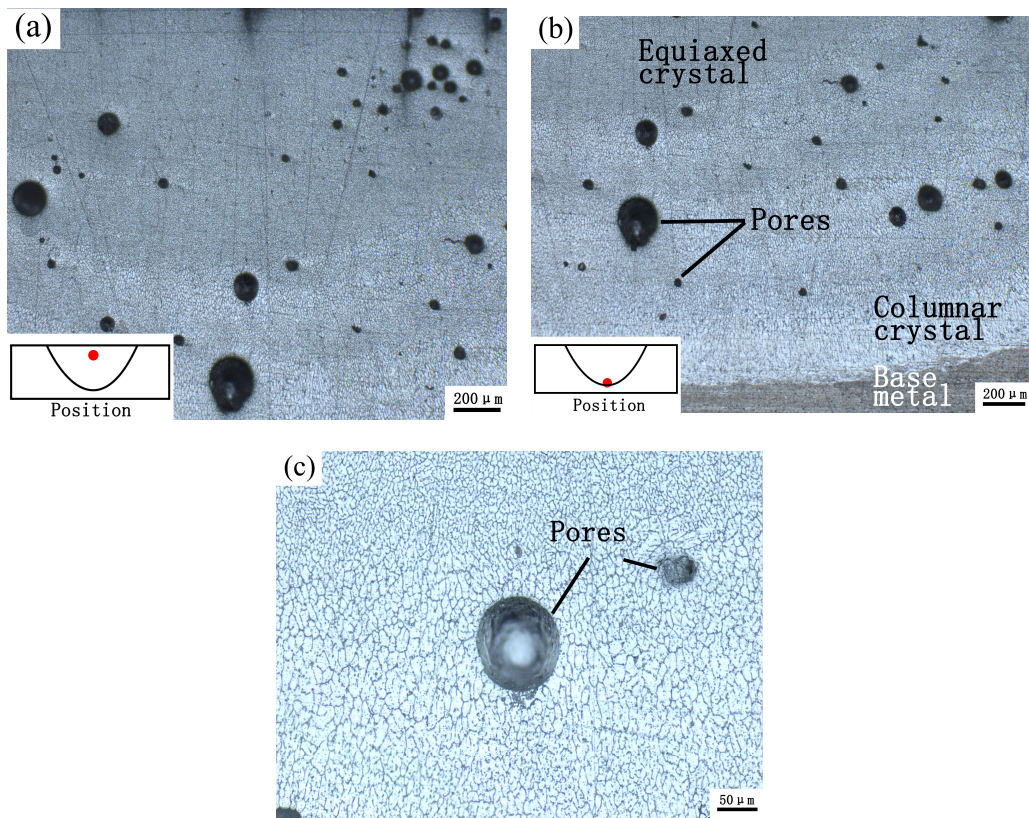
The CaF<sub>2</sub> weld section (a) the weld center; (b) the weld bottom; (c) pores.
